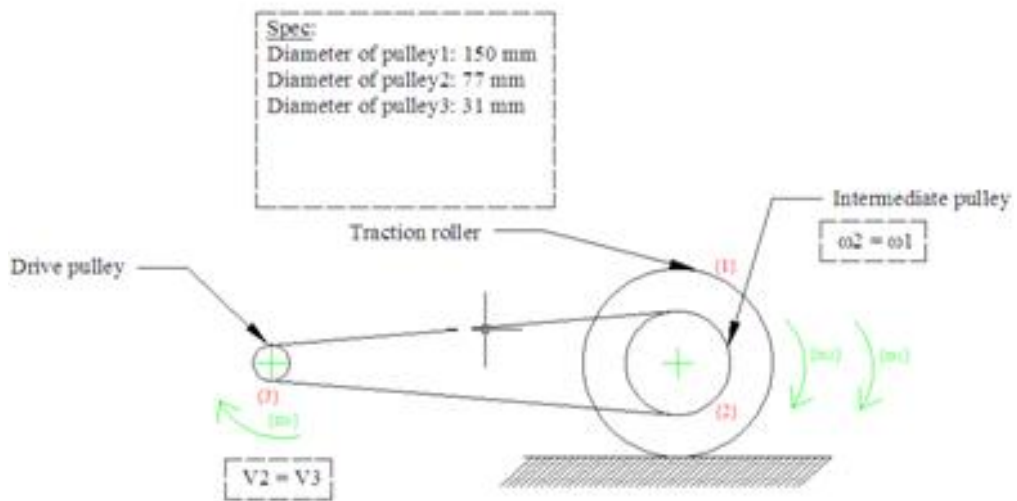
24 Pulleys arrangement for power transfer between the drive motor and the drive wheel (traction roller)
